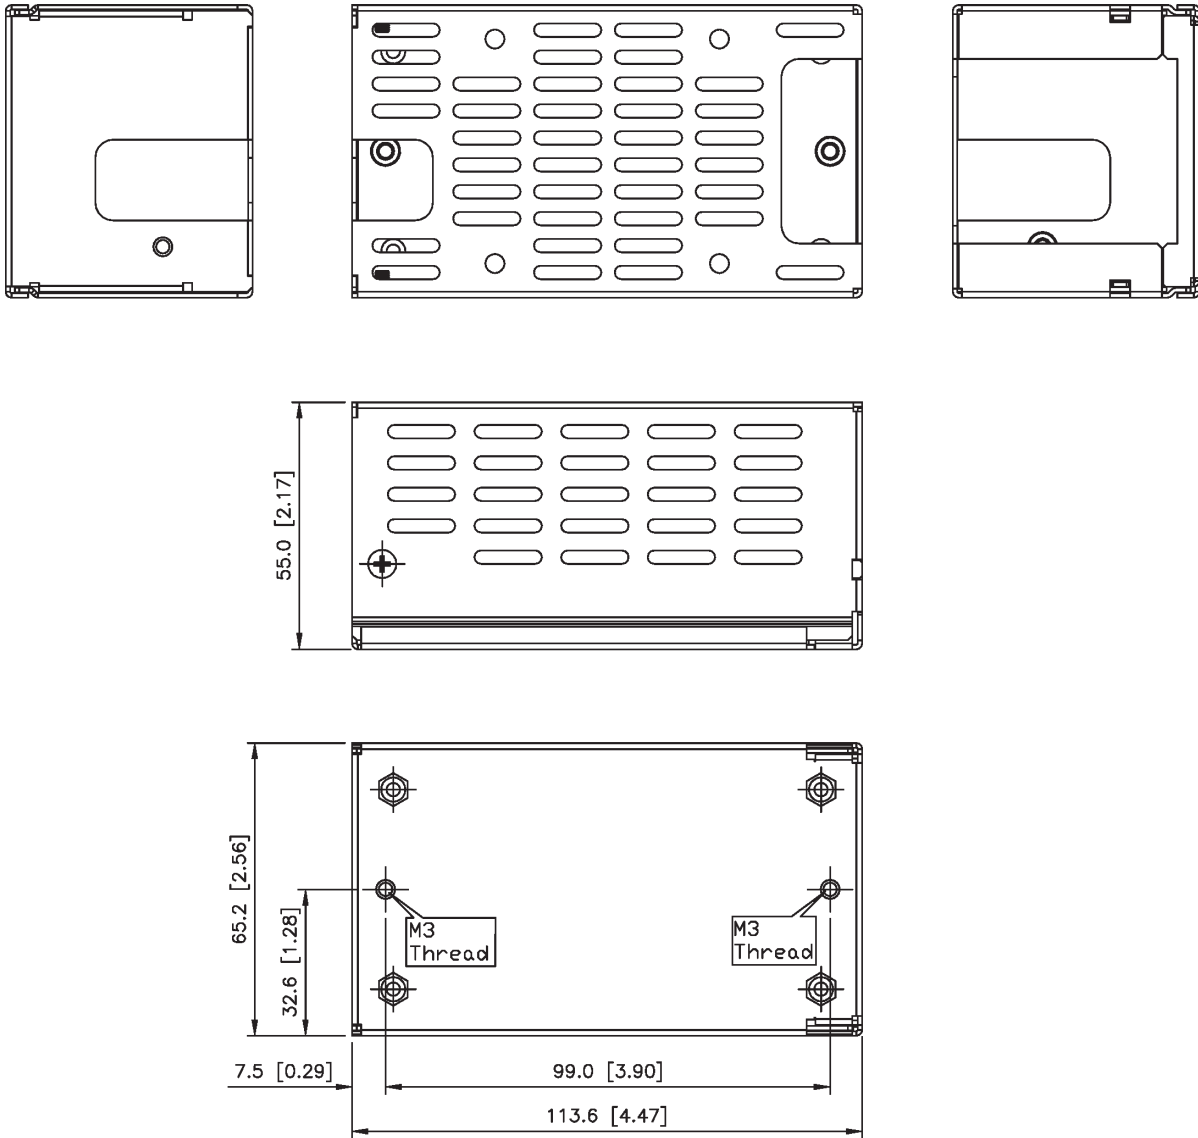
Mechanical Drawing – EPG300-1XXX-U
